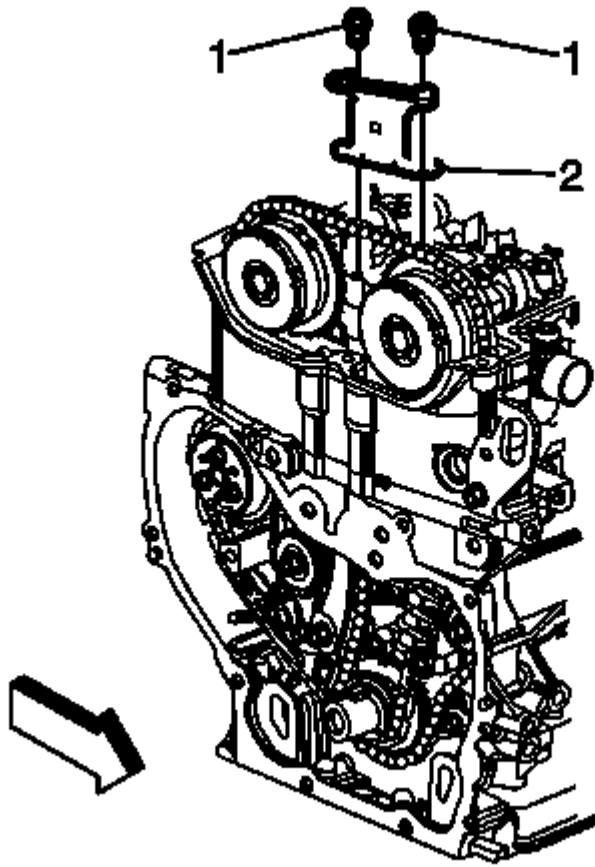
Upper Timing Chain Guide Bolts And Guide
